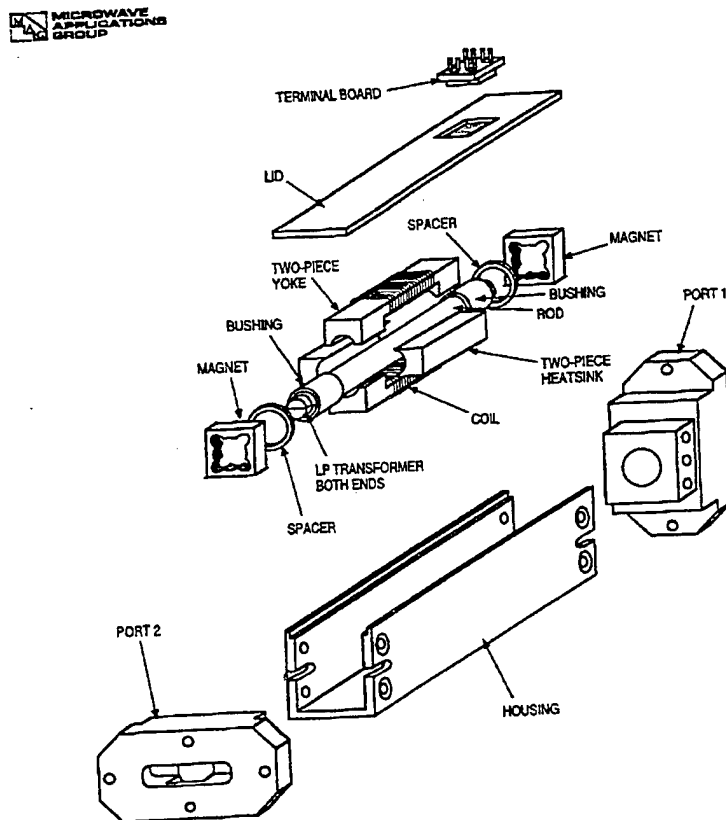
Exploded View of Ku-Band Dual-Mode Phase Shifter
